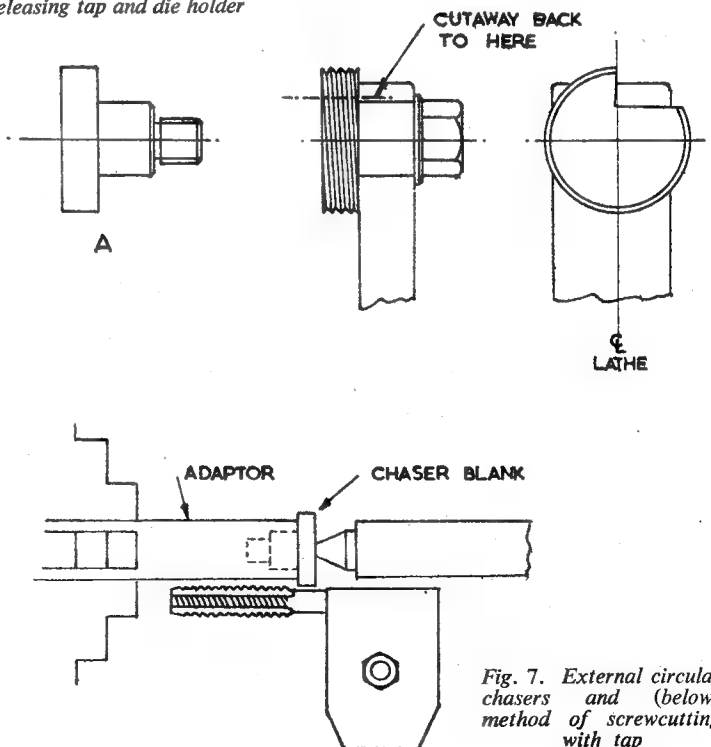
External circular chasers and (below) method of screwcutting with tap
